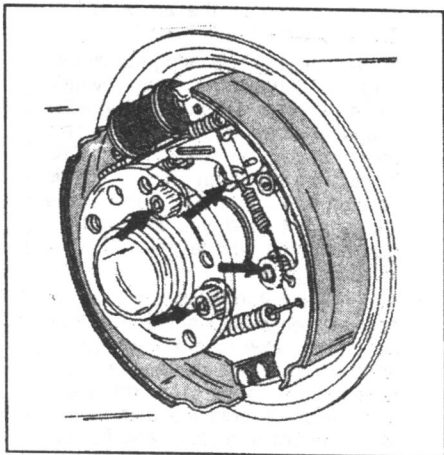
The four bolts (arrows) secure the brake back plate to the rear axle tube.
